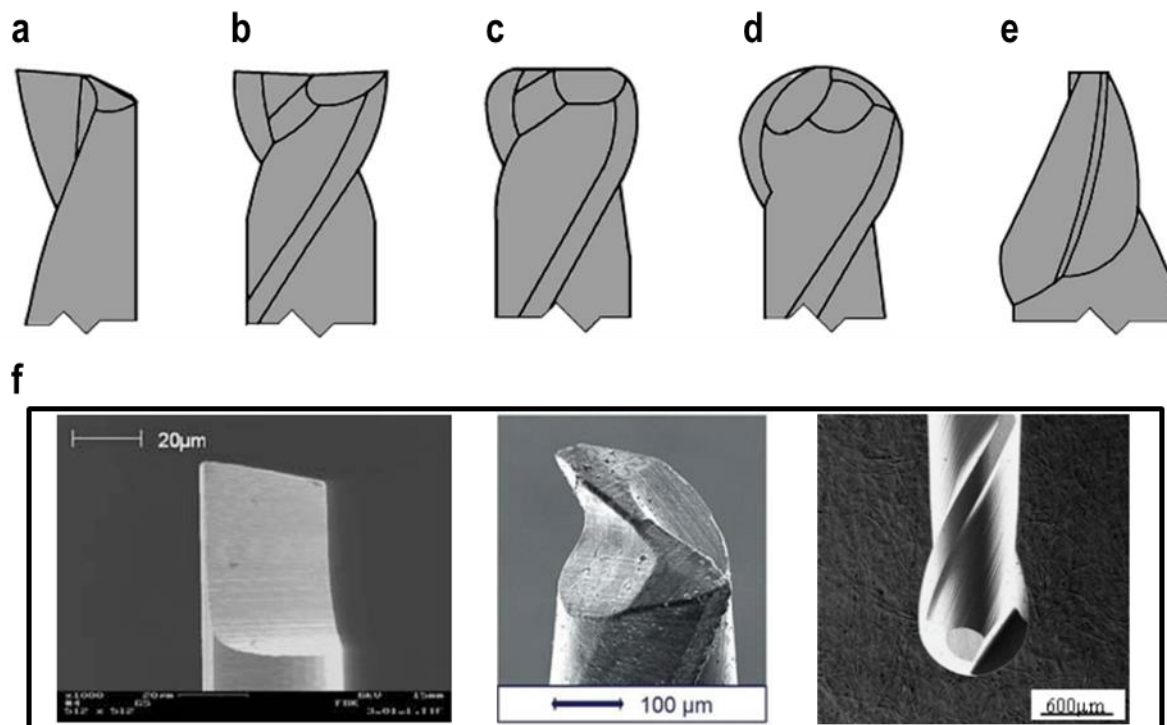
Different geometries of micro-milling tools: a) single-fluted flat end mill, b) two-fluted flat end mill, c) end mill with corner radius, d) ball-end mill, e) tapered micro mill [61], f) SEM images of micro-mill tools [73,79,80].
